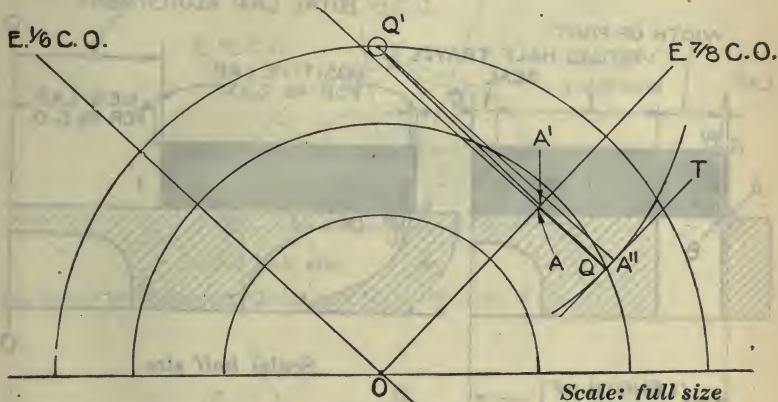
Diagram showing laps for various cut offs of Meyer cut off gear.
